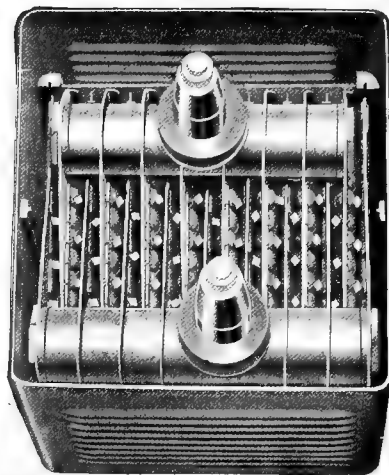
Cell with Cover Removed to Show Assembling and Insulating.
